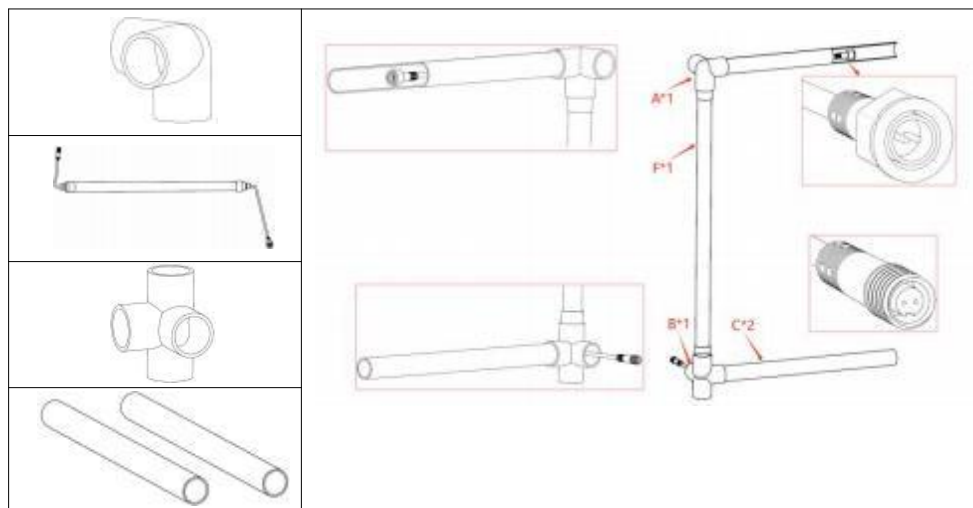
Assemble two 355MM long transverse tubes, a 4-pass, a 3-pass and a light tube as per the figure (Note: the lamp wire is in the 3-pass and 4-pass outlet holes).
